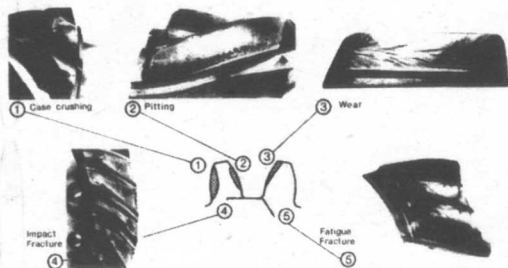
Possible kinds of damage of overloaded gears
